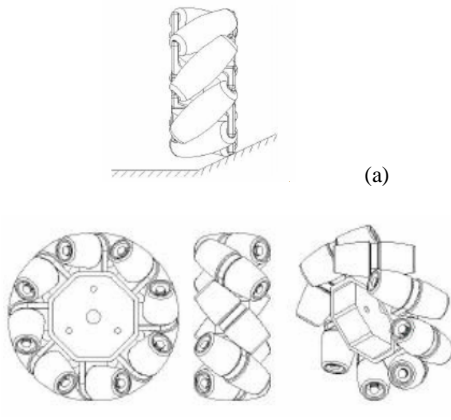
a) Traditional Mecanum wheel on inclined surface; b) Mecanum wheel with centrally mounted rollers
